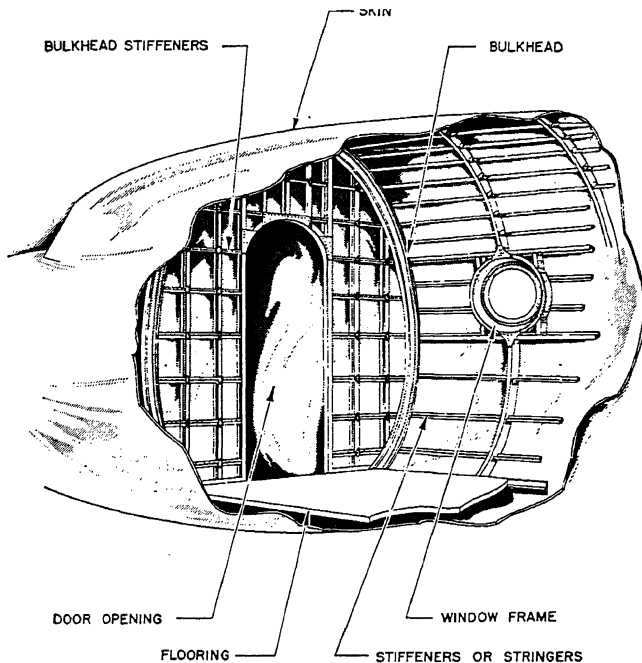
3—Typical Stressed Skin Fuselage Construction
